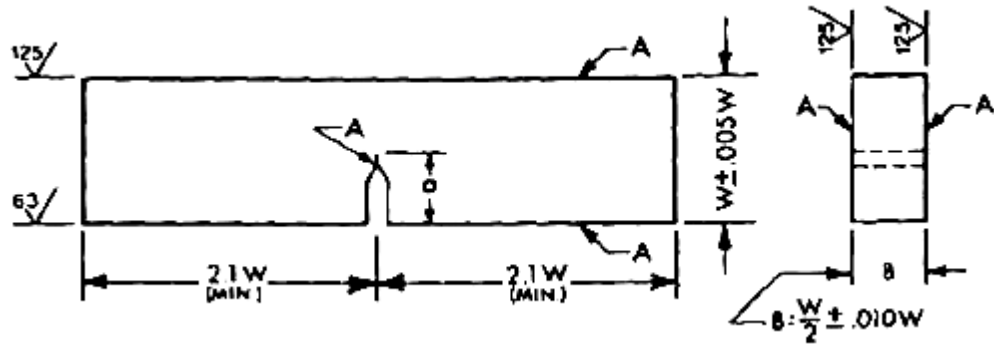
Single-edged notched beam (SENB) specimen dimensions, ASTM E399 (1981).
